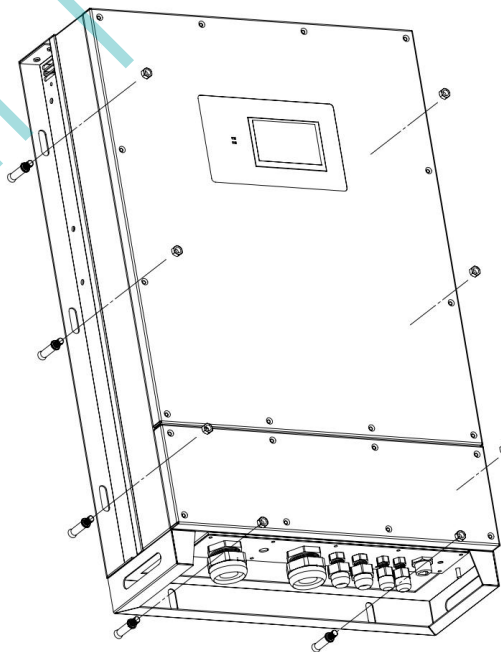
Wall-mounted ASVG-NC Mounting Hole Diagram
